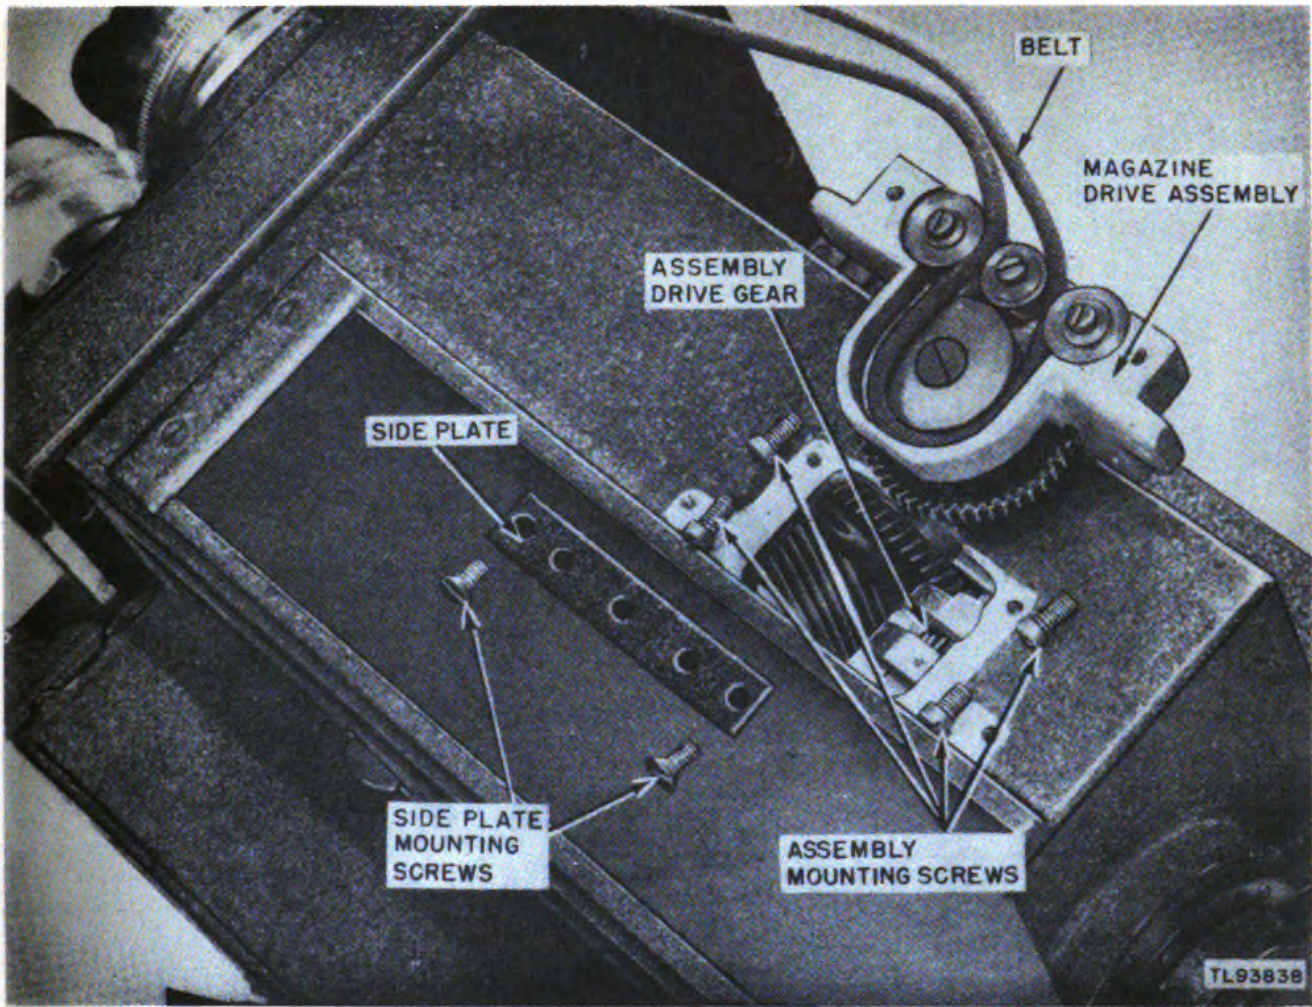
Top view of camera box, showing magazine drive assembly removed.
